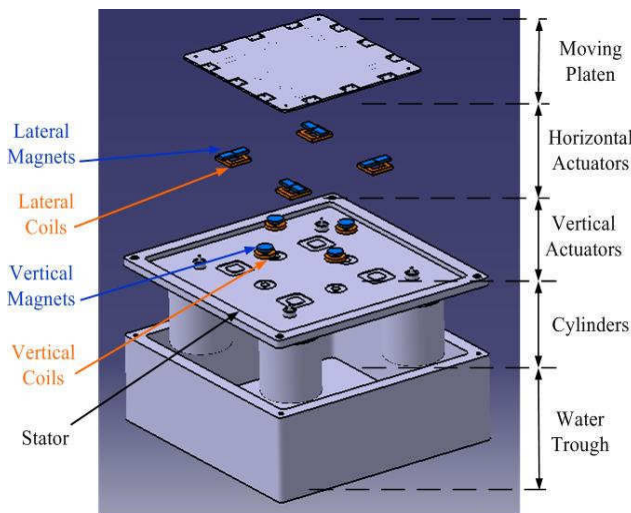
Explosive view of the proposed 6-DOF positioner.
